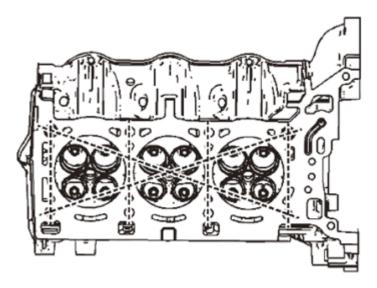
Identifying Distortion For Cylinder Head Surface On Piston Side Courtesy of SUZUKI OF AMERICA CORP.
